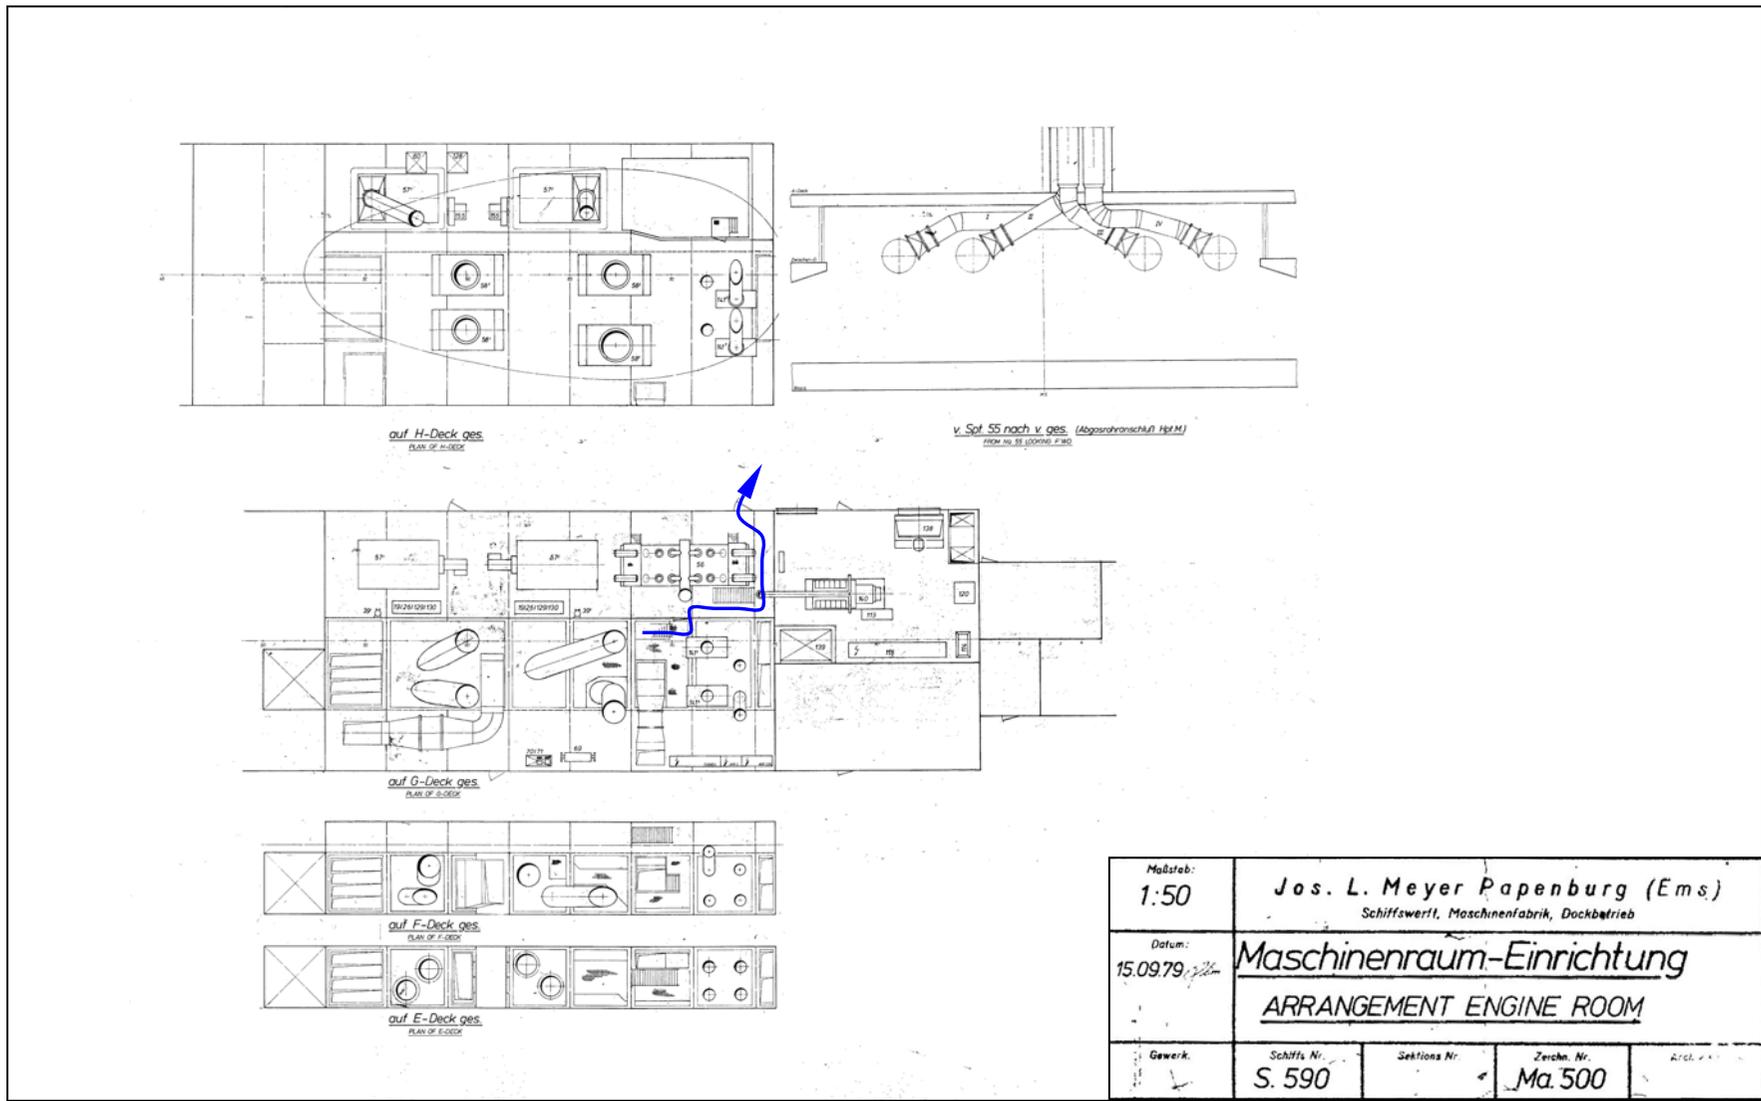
Extracts from the Jos. L. Meyer drawing No. MA500 showing also the upper parts of the egress route out of the ECR in detail.
